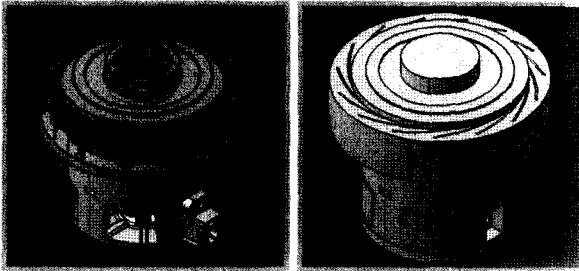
Vacuum cleaner motor external form third dimension modelling
